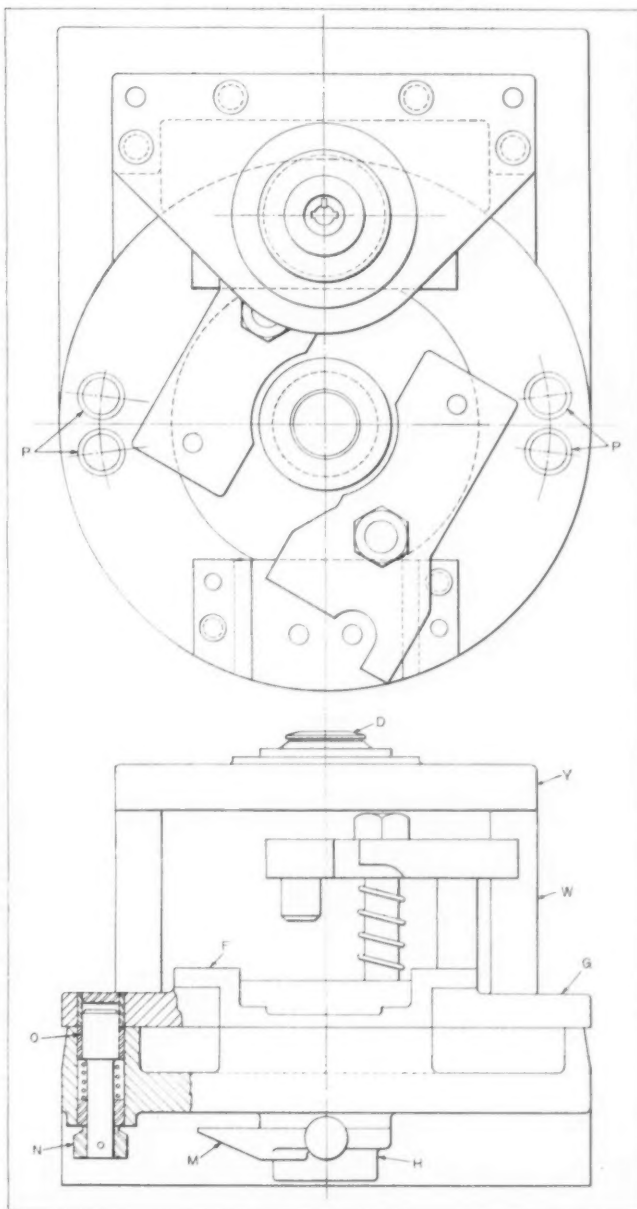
Plan and Elevation Views of Precision Boring Fixture for Boring Valve Bodies on a Drill Press
